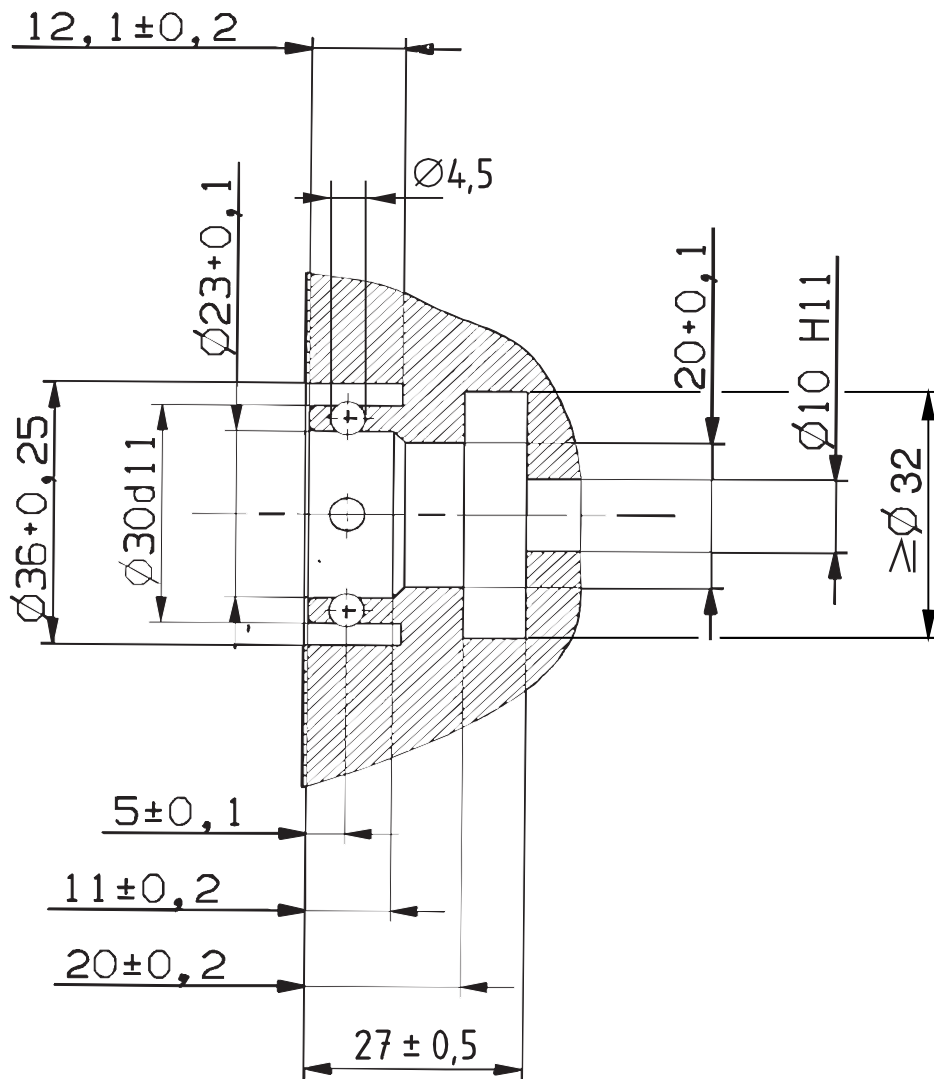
Dimensions of gas-specific connection point for supply and disposal of air for driving surgical tools
